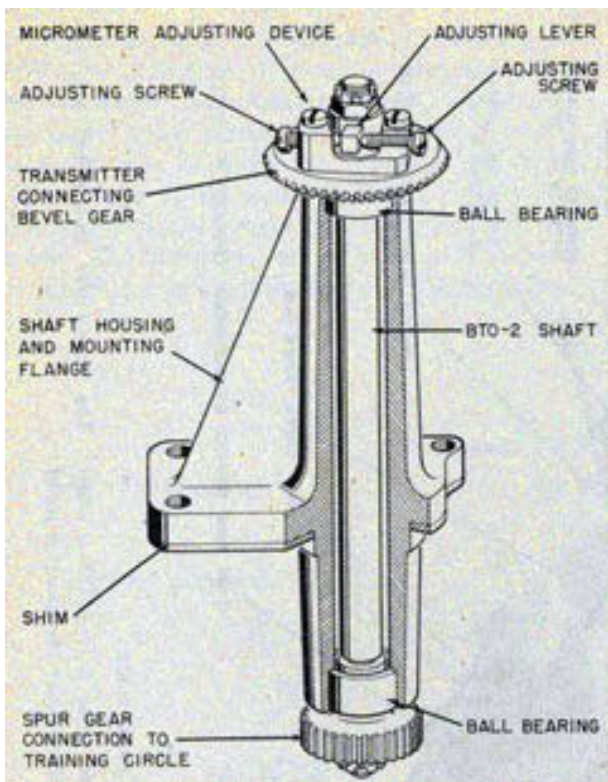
Cutaway of back post (BTO-2 shaft) showing micrometer adjustment and connecting gear.
